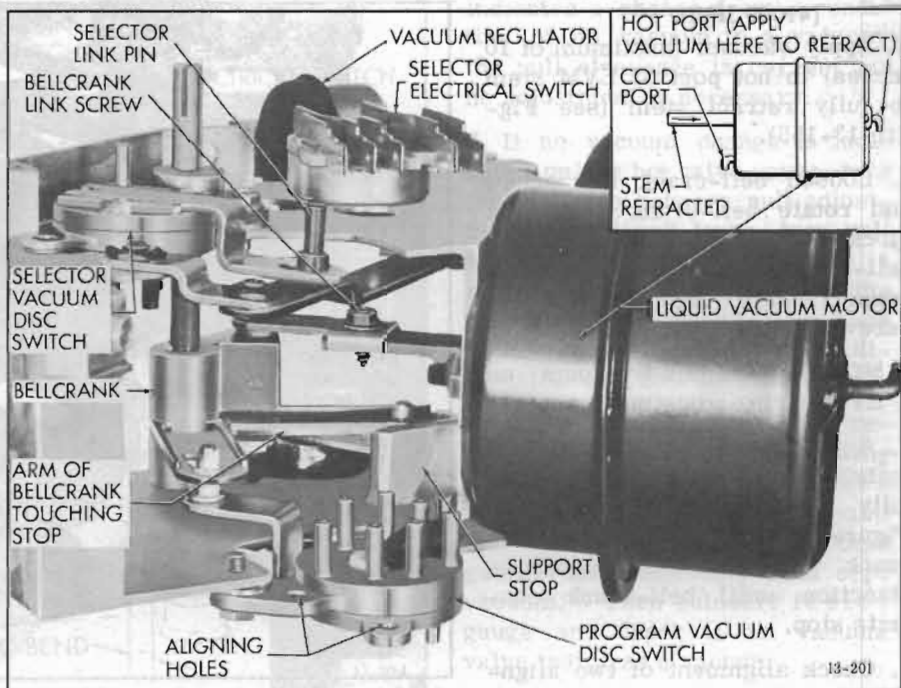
Liquid Vacuum Motor with Stem Retraction (45-46-48000 Series)
